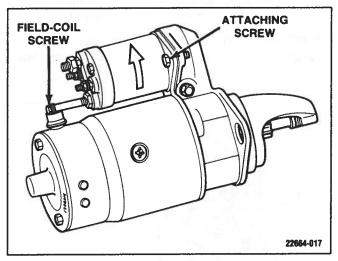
Field-Coil-To-Solenoid Strap Removal
